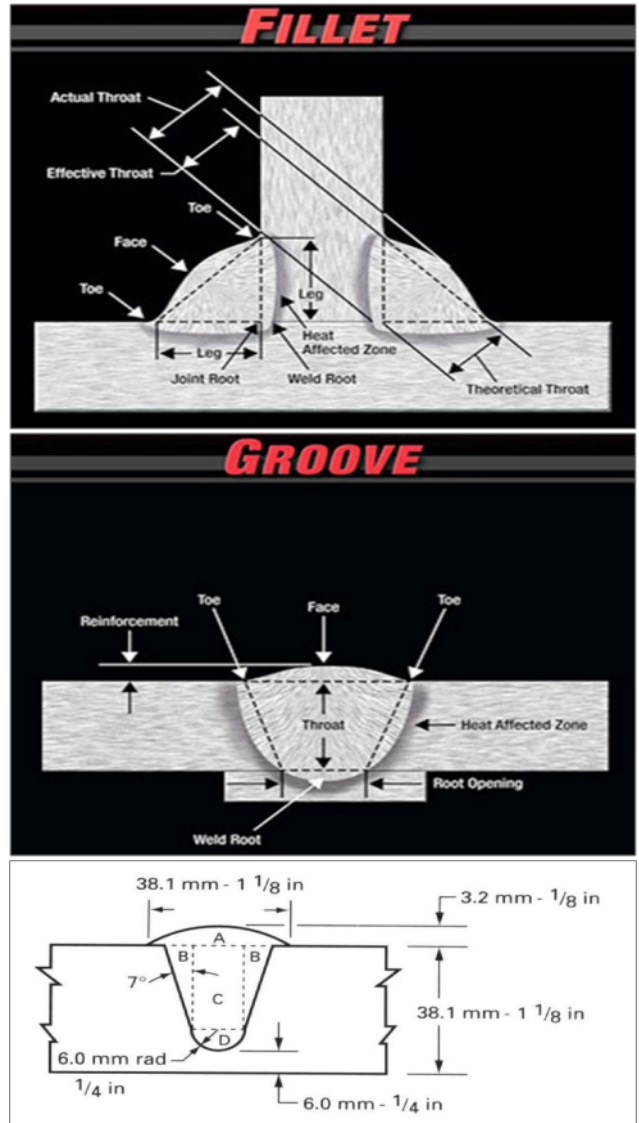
Weld cross section used – procedure for calculating weight of weld metal
